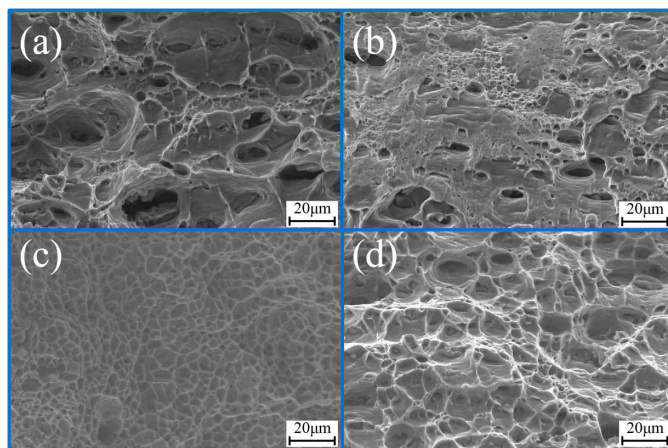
The fracture surface of joints: (a) the AW joint; (b) the PWCR joint; (c) the PWSHT joint; and (d) the PWCR-SHT joint.
